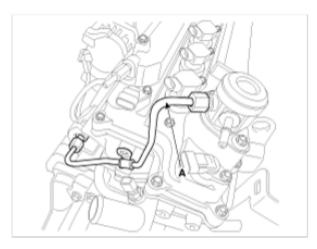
Identifying High Pressure Pipe Courtesy of HYUNDAI MOTOR AMERICA
